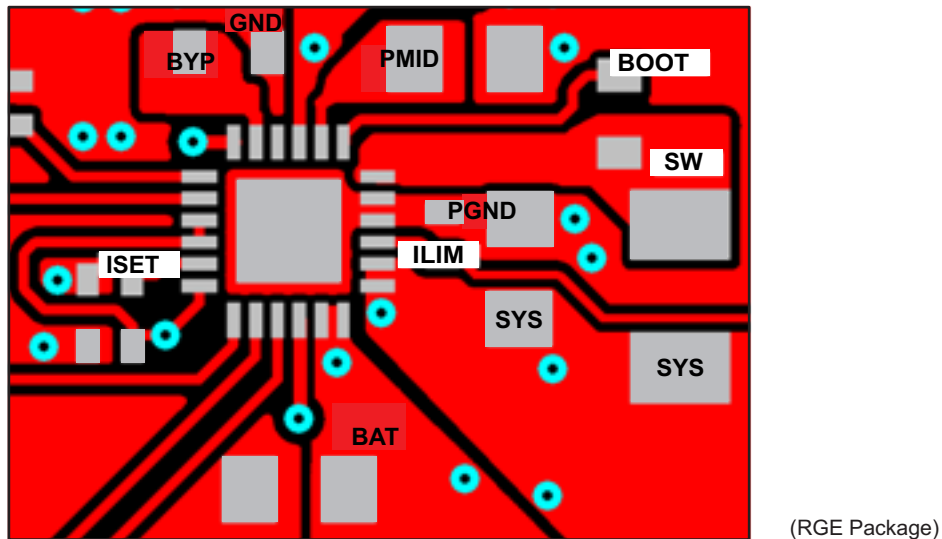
Recommended bq24278 PCB Layout for RGE Device
